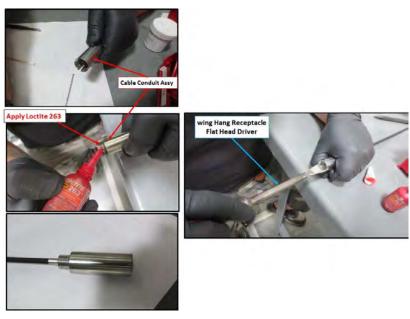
CABLE CONDUIT ASSEMBLY
